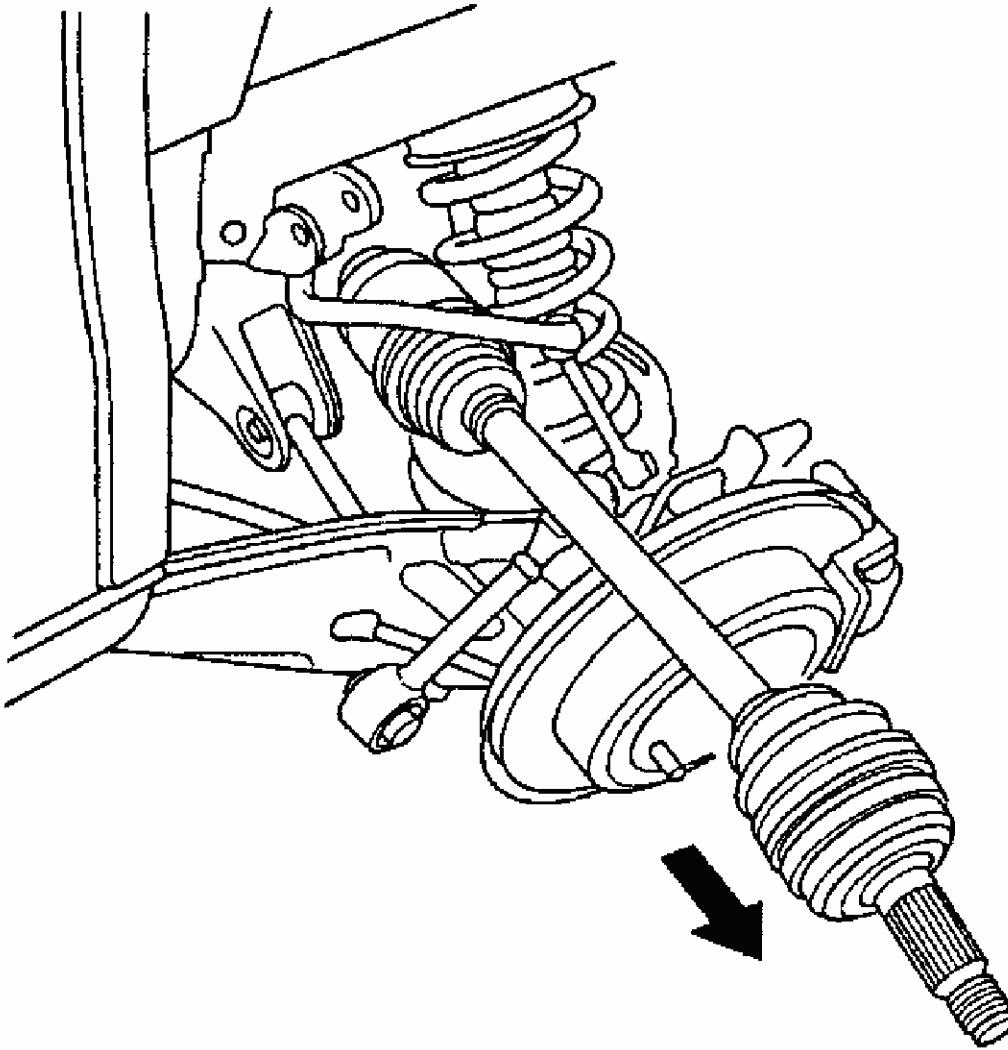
Removing Rear Axle Shaft Outboard Joint
